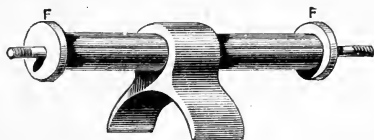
Magnet Core with Flanges and Pole Pieces.
